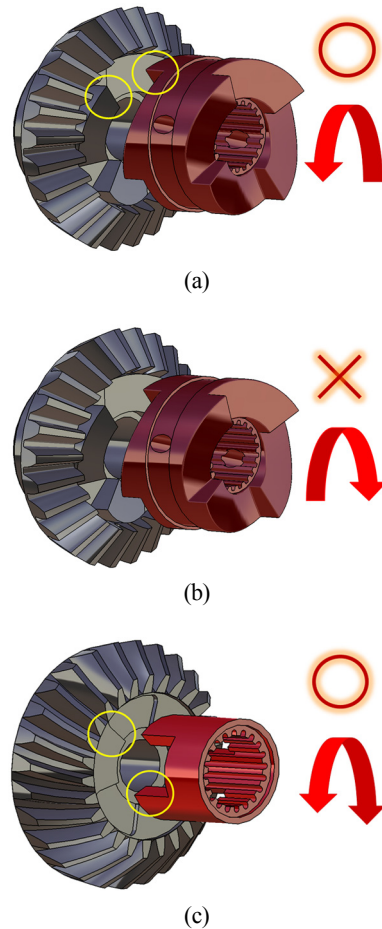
(a) As anti-clockwise rotation on driving system, (b) as clockwise rotation on driving system of outboard motor, (c) designed bevel gear & key for outboard motor
